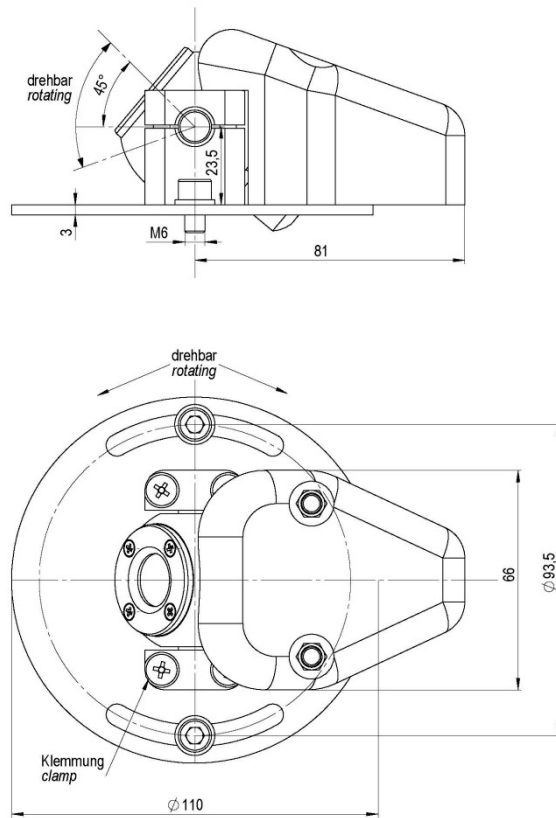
Dimensions ball head sensor type NOS-V20BS
